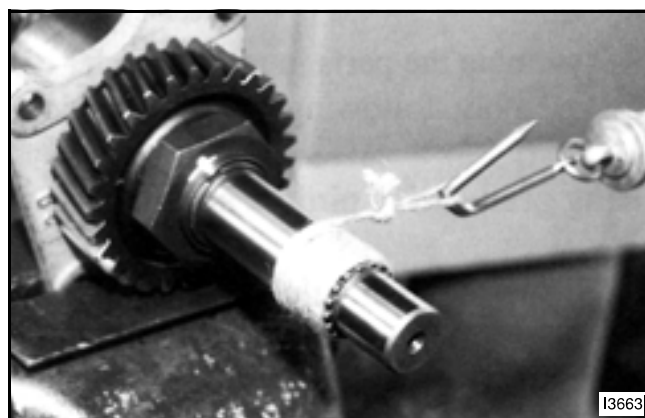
Be sure that starting torque of drive pinion meets the specified level.
